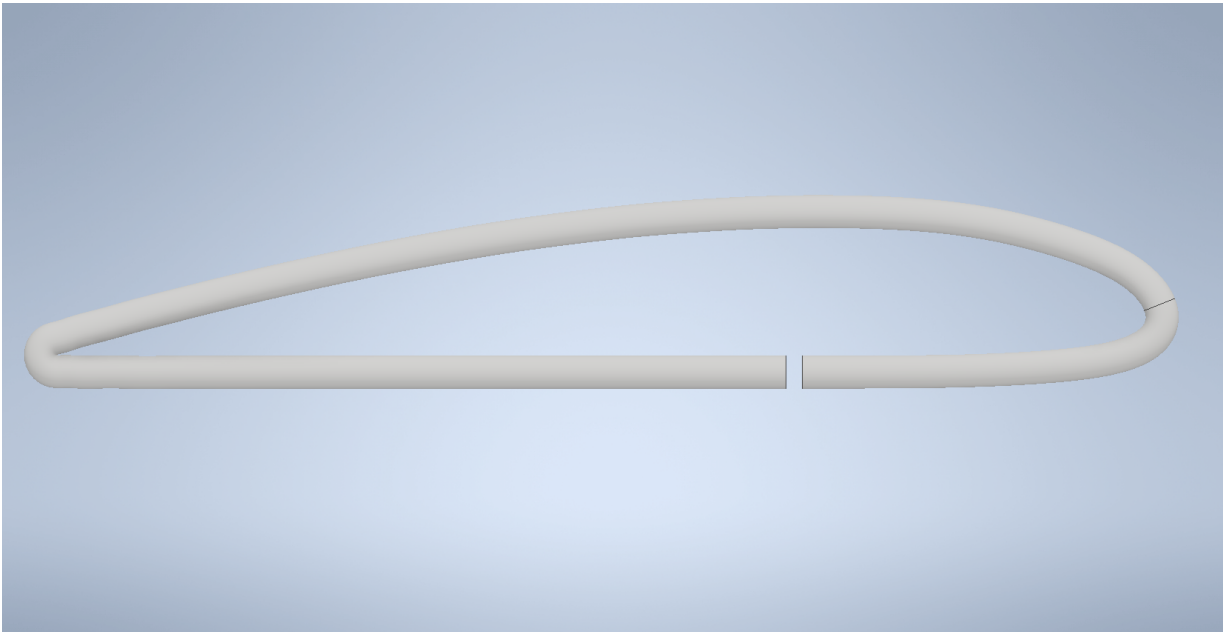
Side view showing a single wireframe section with a section removed for actuator placement
